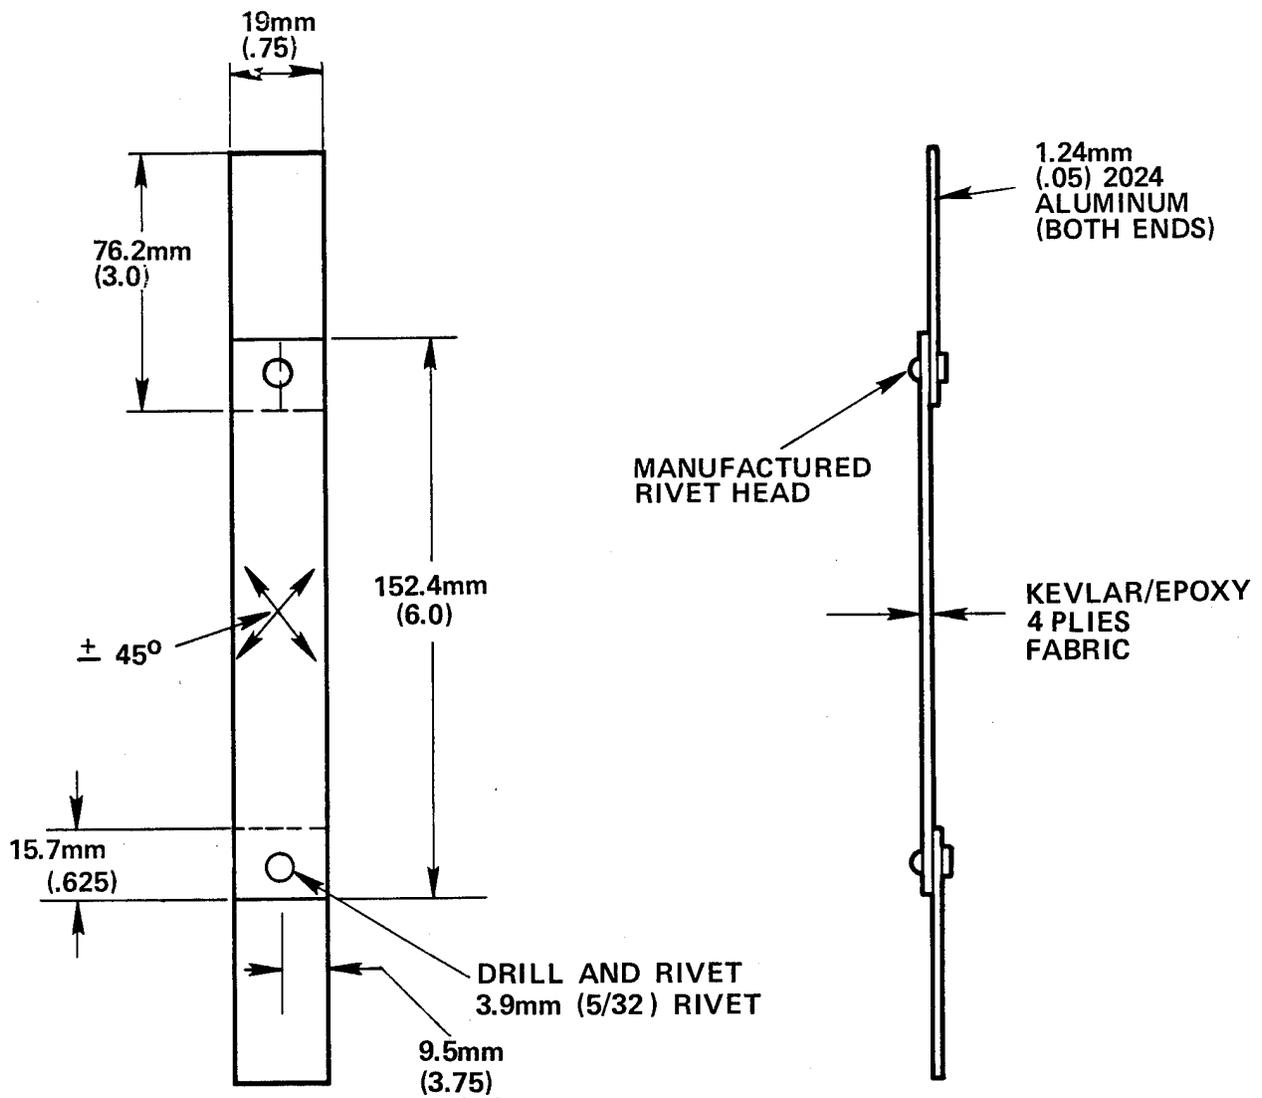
KEVLAR/EPOXY-ALUMINUM RIVETED TEST SPECIMEN
